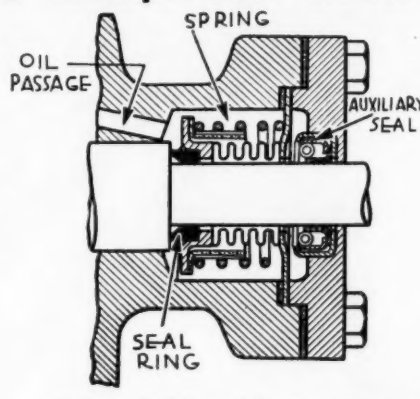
Section of Stewart-Warner compressor shaft seal, showing auxiliary seal in cover plate.
